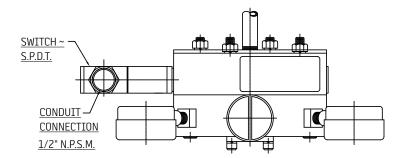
DR459 Reversing Valve and Bracket Mounting Assembly for Non-Return Systems
